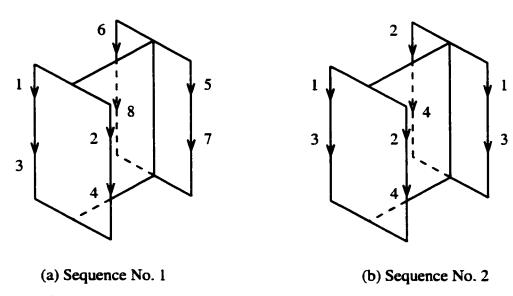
Welding Sequences Investigated by Nagaraja Rao and Tall (1963)
